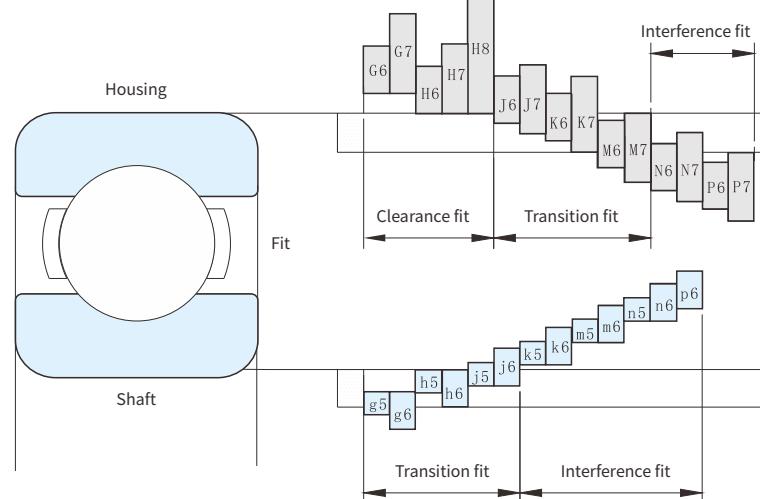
Dimension tolerance and fit of shaft and outer bore
